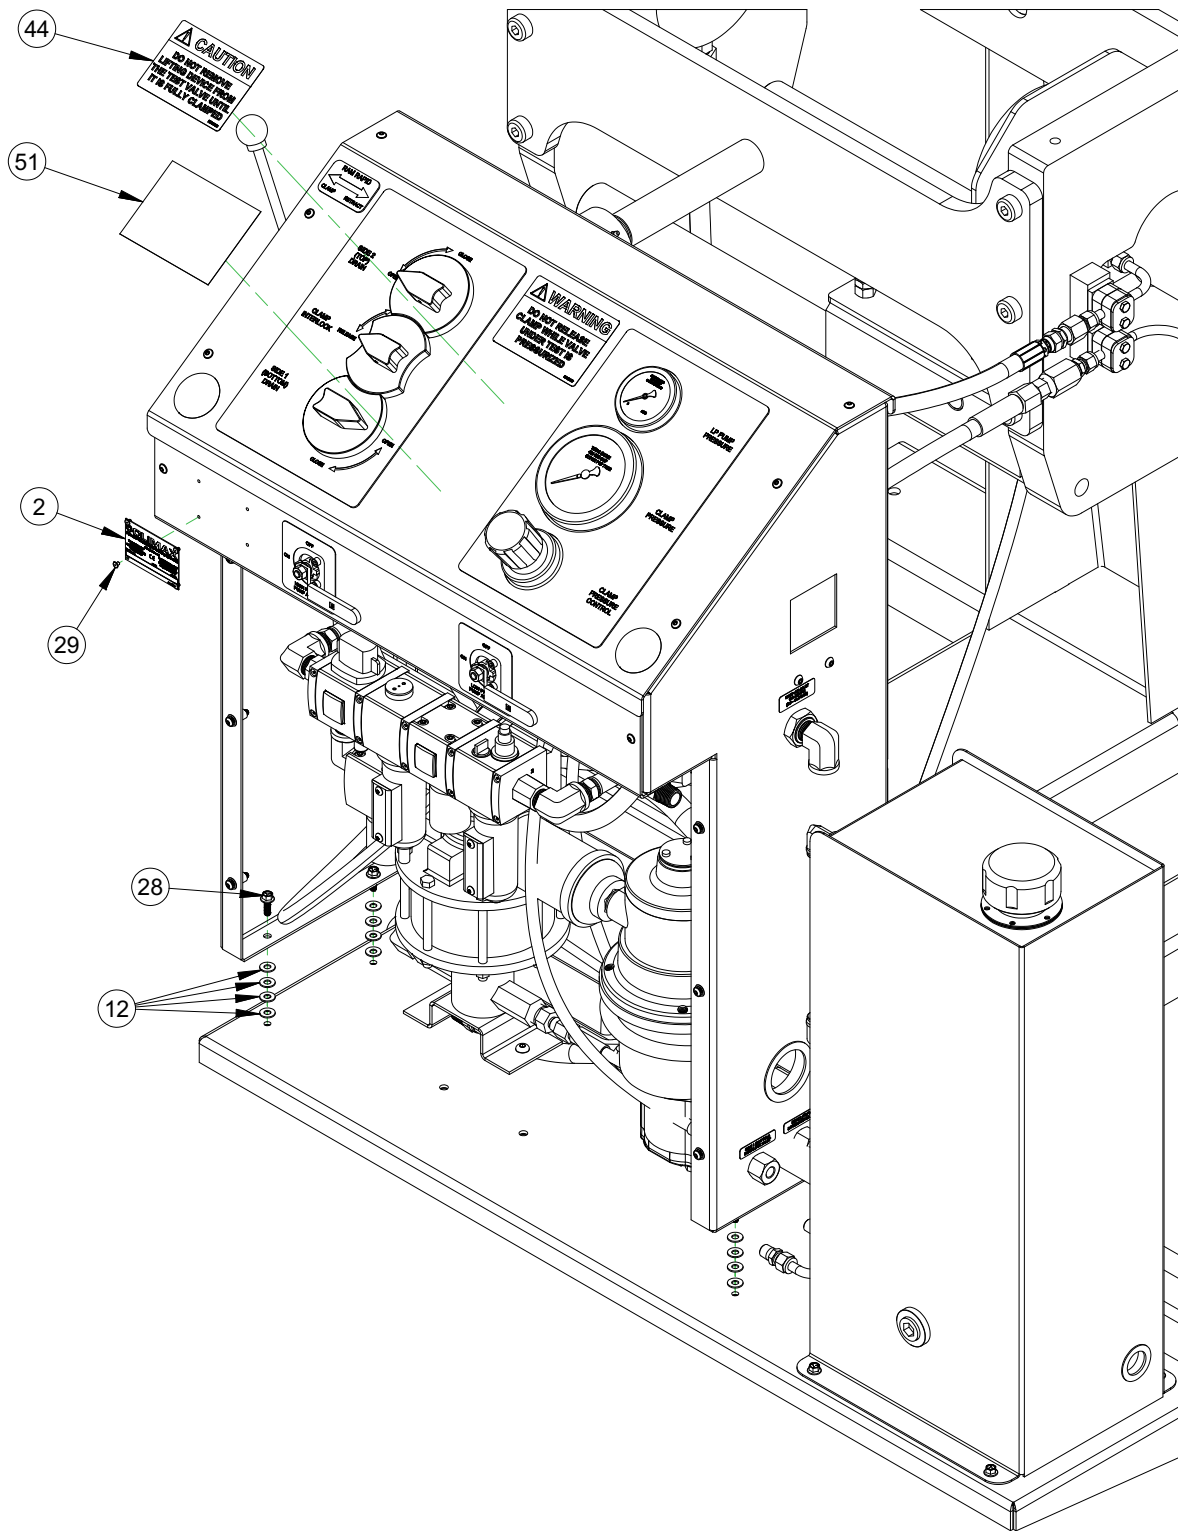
USV-2-25T ASSEMBLY 4 (P/N 90206)
